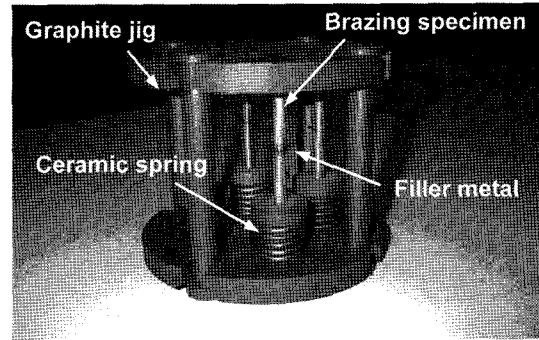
Graphite jig for specimen assembly and vacuum brazing.
